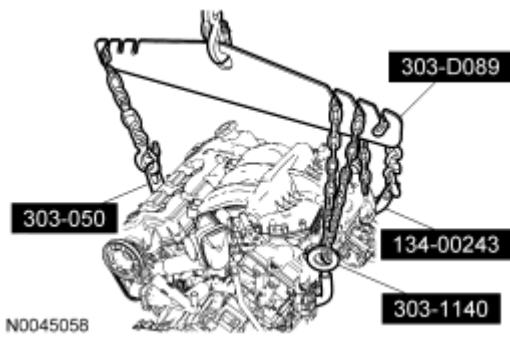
Identifying Special Tools (134-00243, 303-050, 303-1140, 303-D089)
